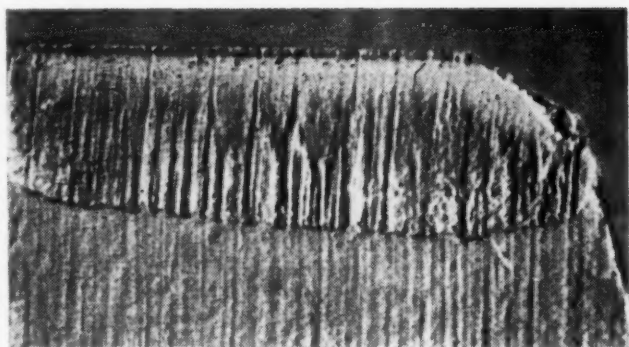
CUTTING EDGE AND CHIPS FORMED AT 1720 FPM
